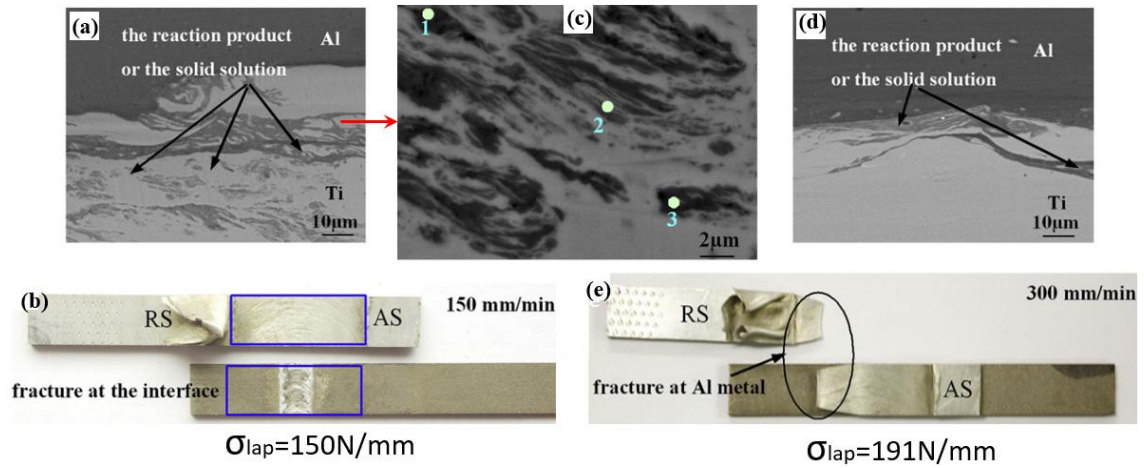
Typical micro-morphologies of the joining interfaces at welding speeds of (a) 150 mm/min, (b) 300 mm/min welds made using $\omega = 950$ rpm [58].
